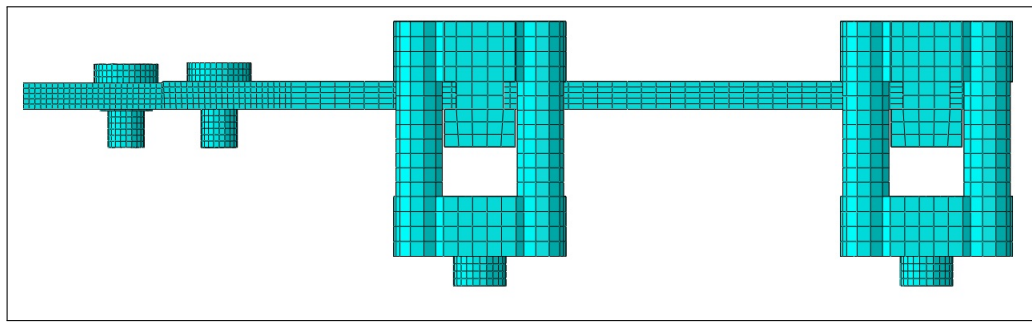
Finite Element model of workpiece and compliant components of the fixture
